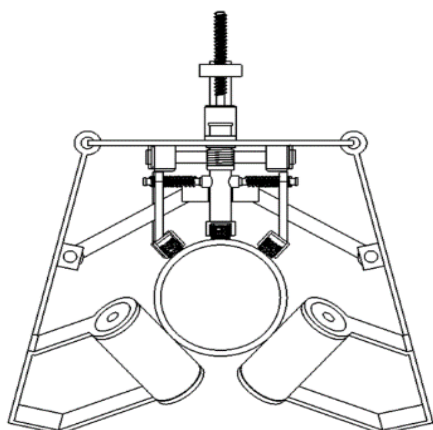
Two-dimensional side view of tube climbing robot outside the tube.
